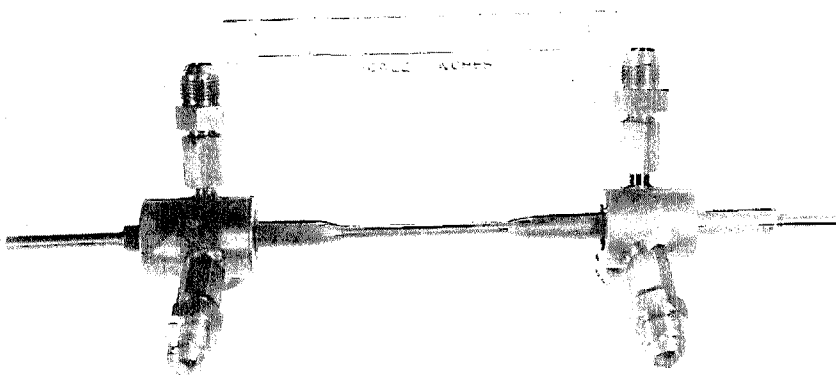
Test Section Assembly Having 0.01-in.-diam. Jacket
